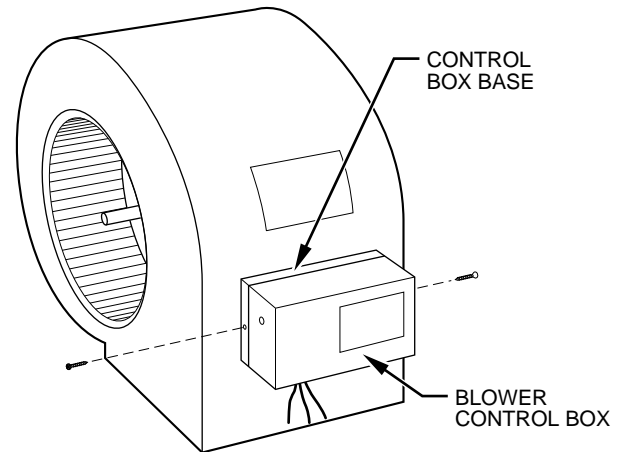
Attaching Control Box to Control Box Base (3500/EBxxA Furnaces)
